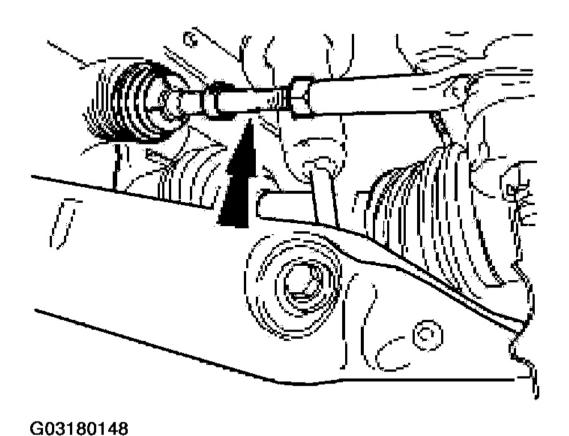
Rotating Front Wheel Spindle Tie-Rods Courtesy of FORD MOTOR CO.
